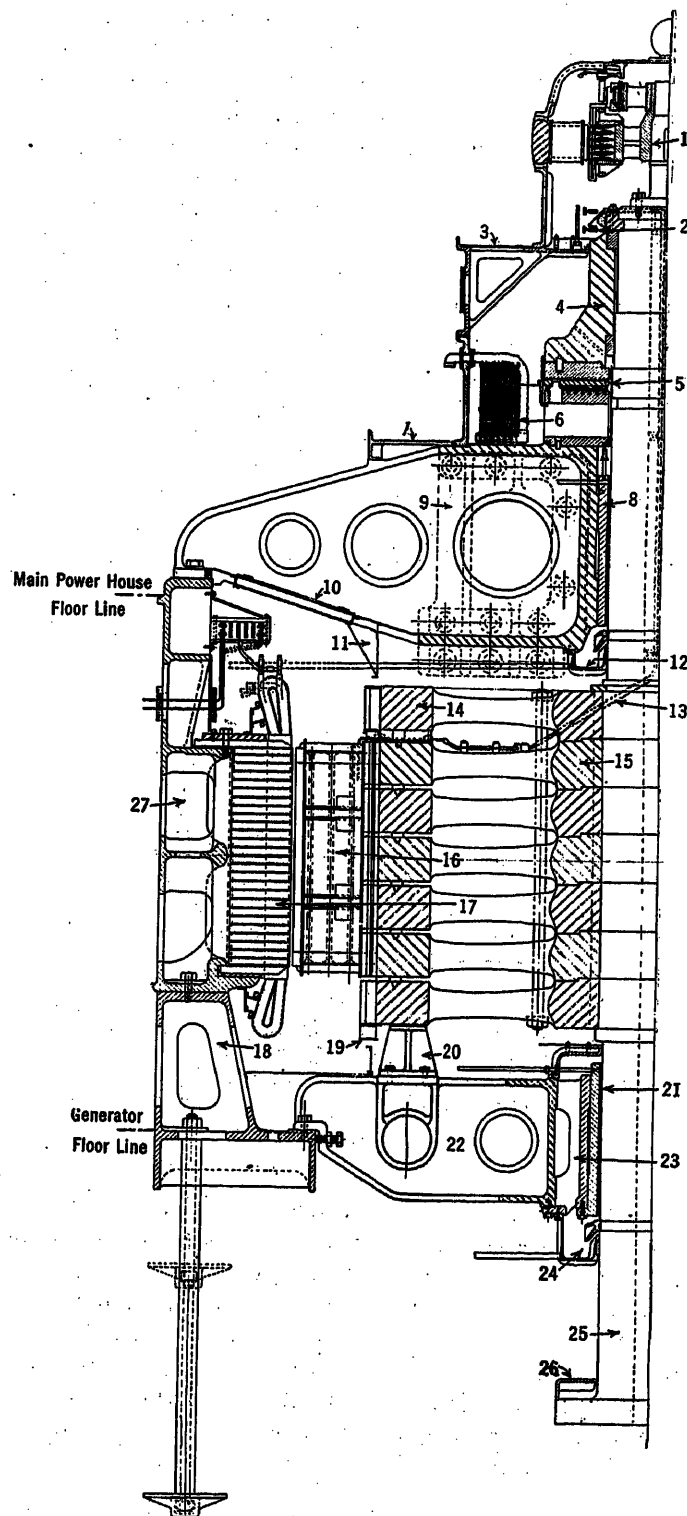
COMPLETE ASSEMBLY SECTION OF UNIT
